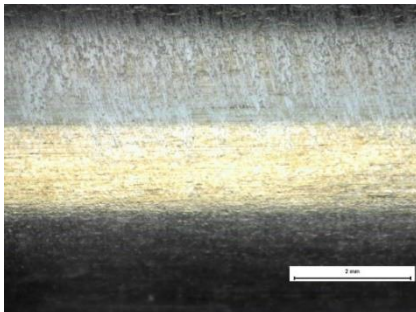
Macrophotographs (4x) of the outer radius of the 2mm bend section for a sample formed at 150°C. [4]
